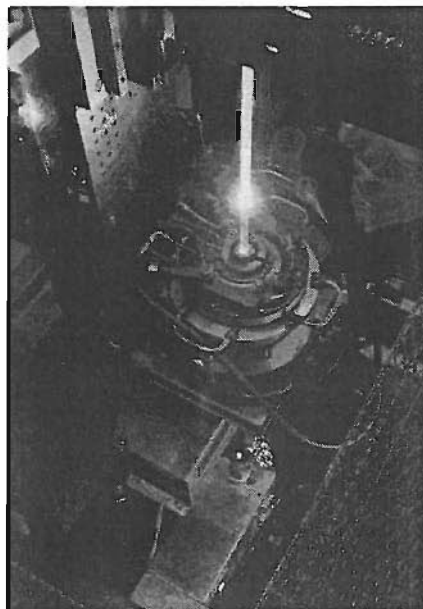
An overhead view of a typical fibre drawing furnace.
